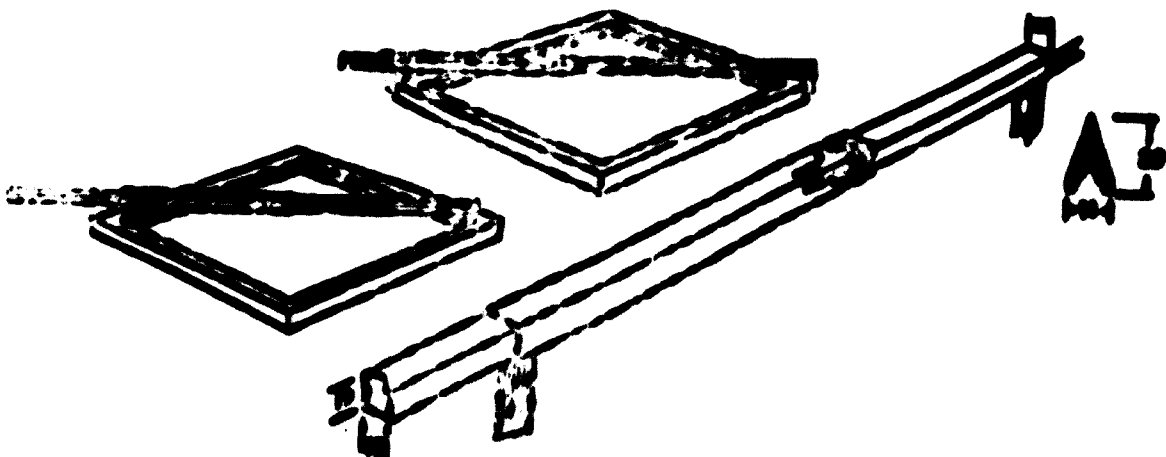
Diagonal measure gauge used for checking of rectangularity.
